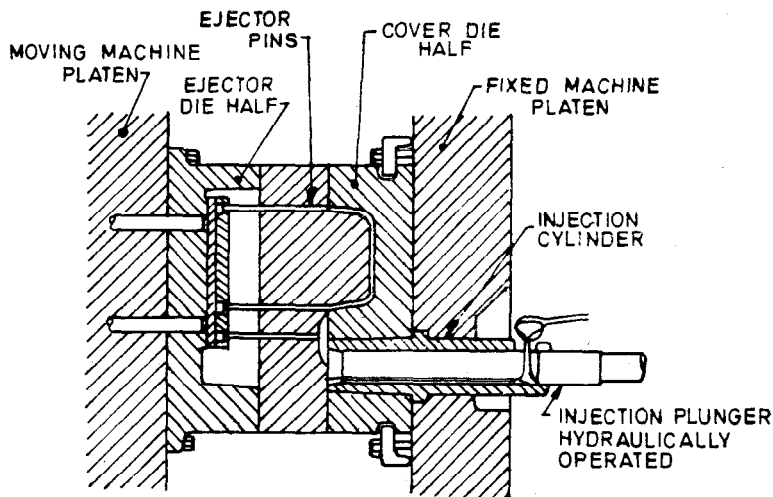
COLD CHAMBER PRESSURE DIE CASTING MACHINE
